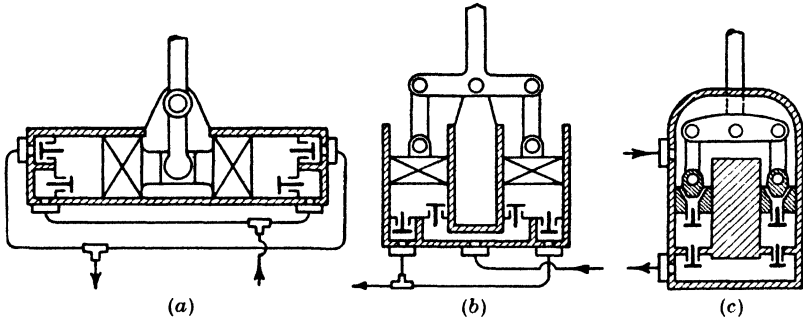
HAND PUMPS—DOUBLE PISTON
